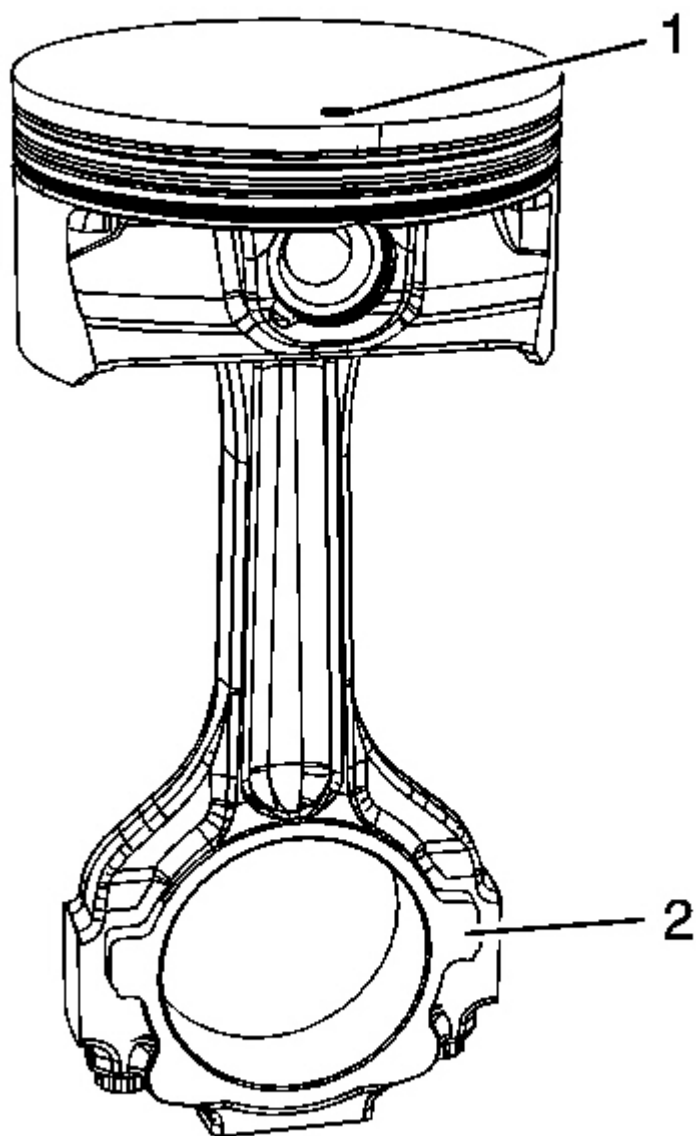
Locating Mark On Top Of Piston & Connecting Rod Tab
